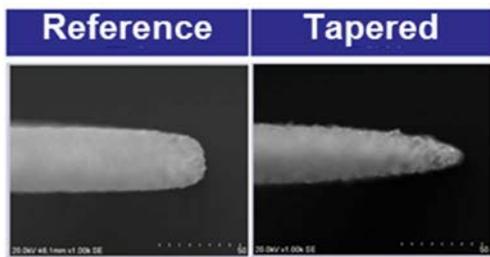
An example of blade tapering caused by lubricant (SEM image of DISCO-manufactured hub-style blade edge)
